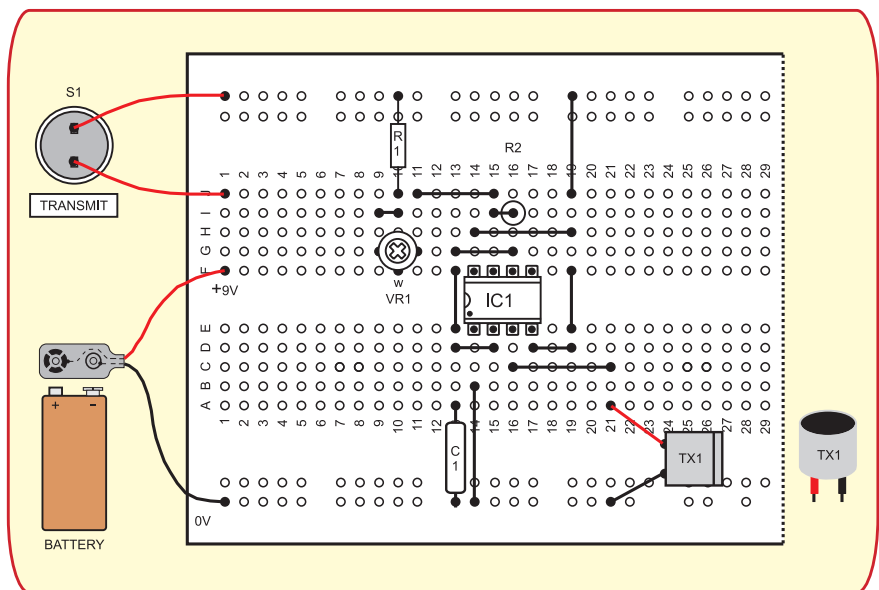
Assembly of the Ultrasonic Transmitter on Protobloc
